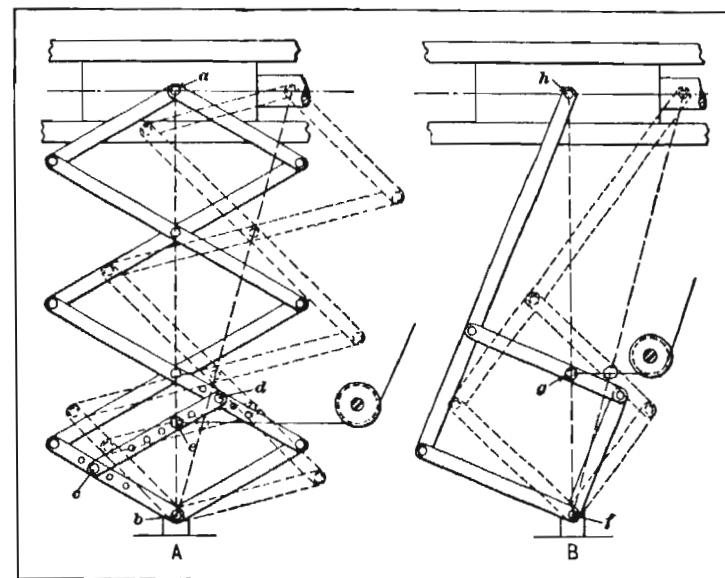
Pantograph Mechanisms Applied to Engine Cross-head to Reduce Motion When Taking Indicator Cards
